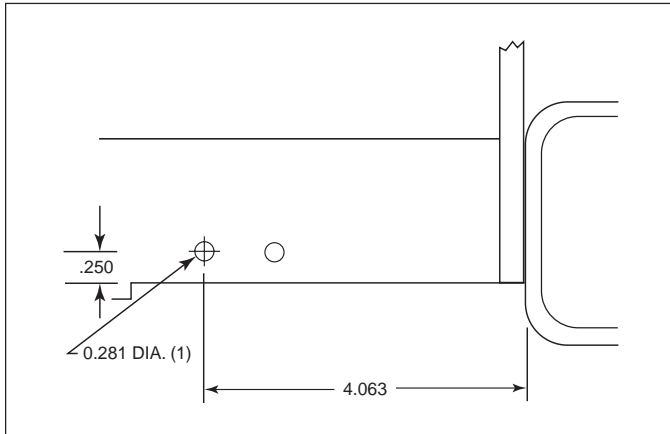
Drilling Plan "A" (For LAF-1600 B Breakers).
